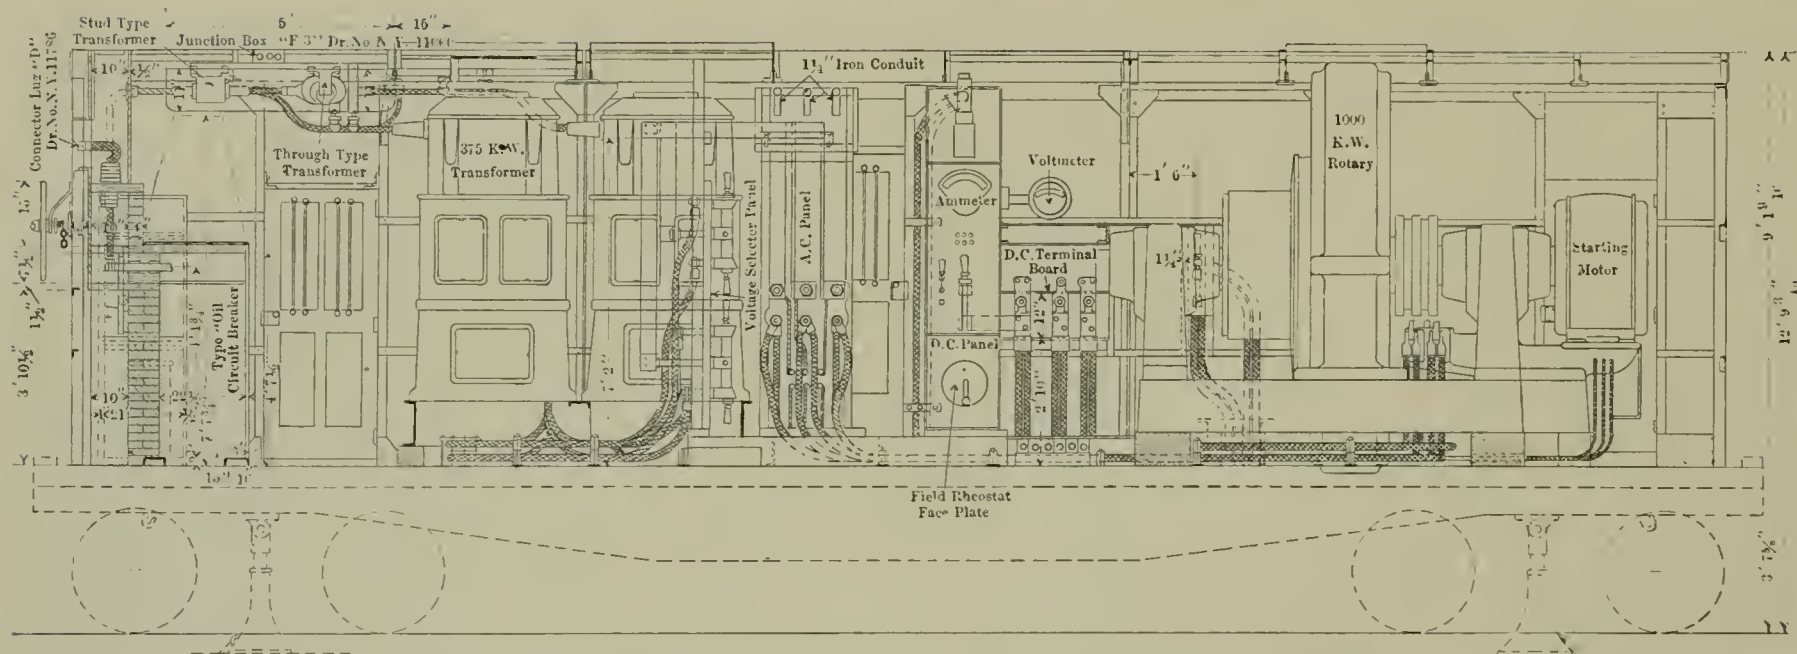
SECTIONAL ELEVATION OF A SUB-STATION CAR, SHOWING ARRANGMENT OF THE EQUIPMENT
